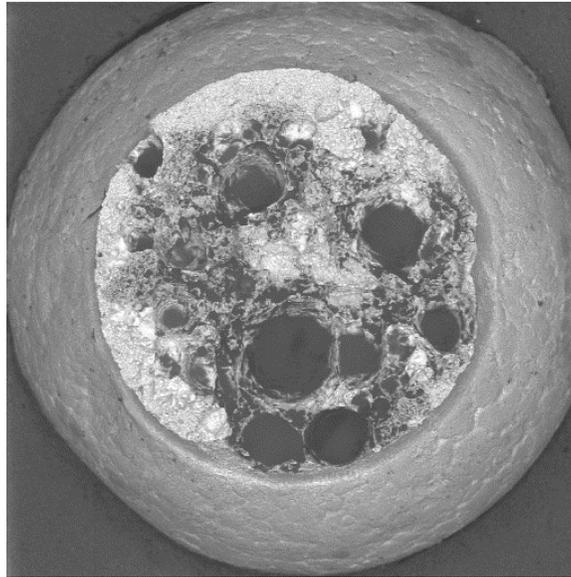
BGA solder joint fracture surface with flux entrapment [137X, BSE SEM image, ref. SLI-882]. This solder joint failed at the BGA substrate/ball interface during a drop test in a hand-held electronic device.
